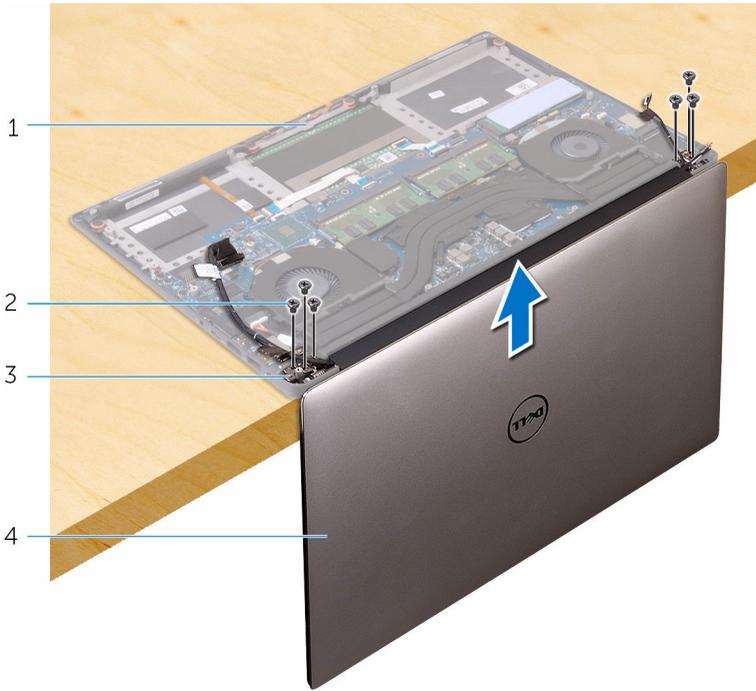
Removing the screws that secure the display hinges to palm-rest assembly
